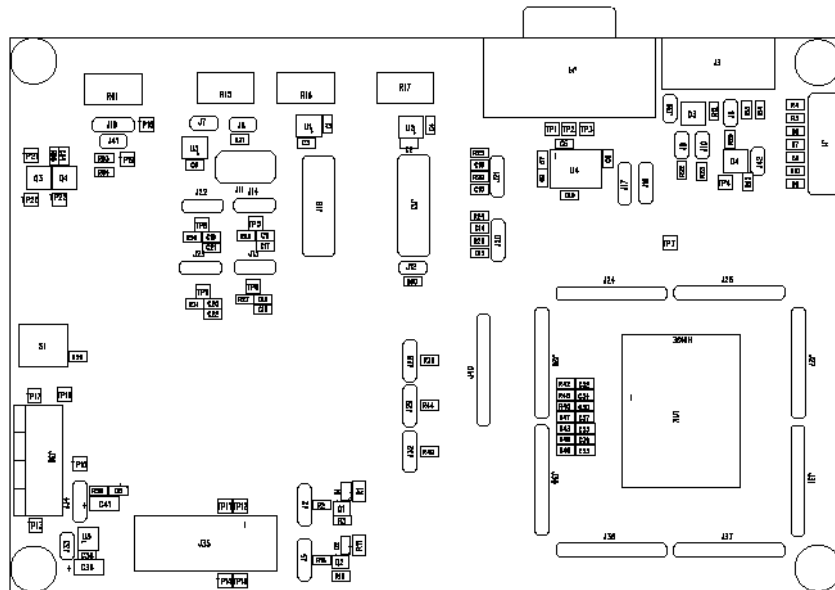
UCD3138OL64EVM-031 Top Layer Assembly Drawing (top view)
